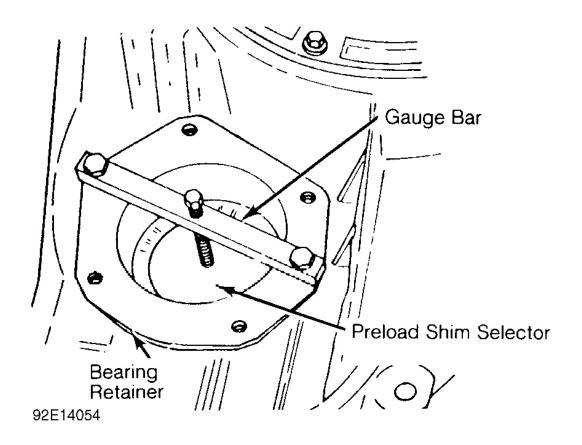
Installing of Differential Bearing Preload Tool Courtesy of FORD MOTOR CO.
